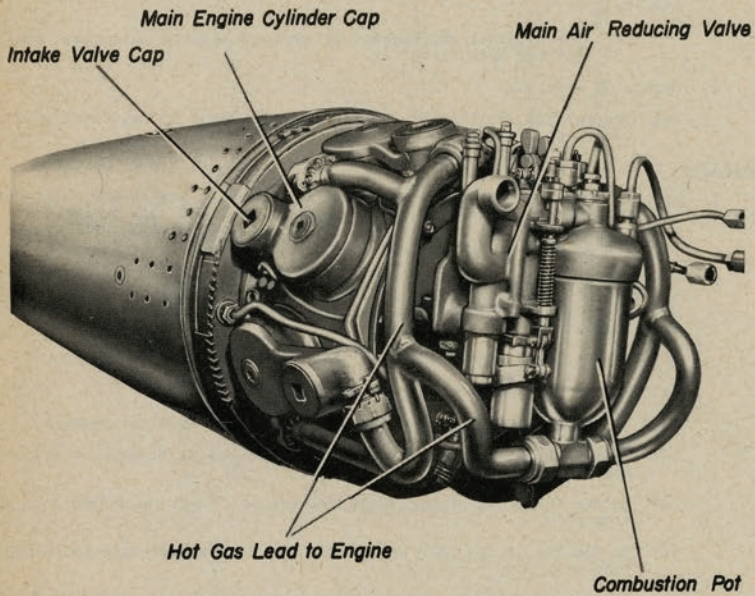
Torpedo Type 91 Mod 3, Engine
